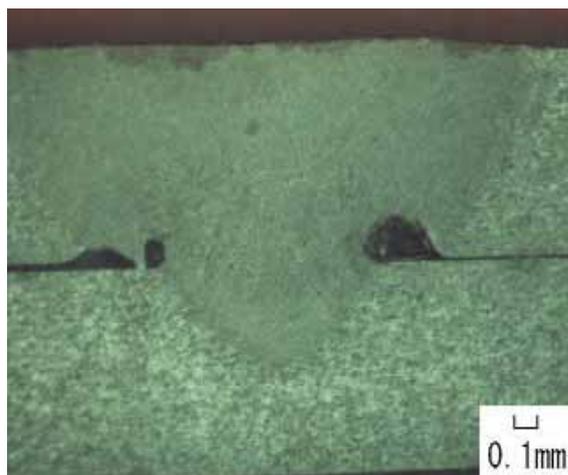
Macro structure of Disk laser lap weld zone.
